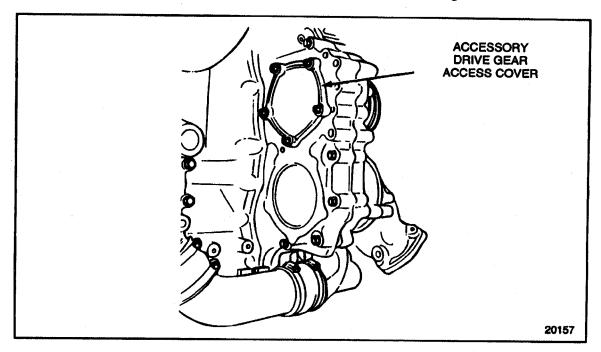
Accessory Drive Gear Access Cover (Pre-1991 Engines)
